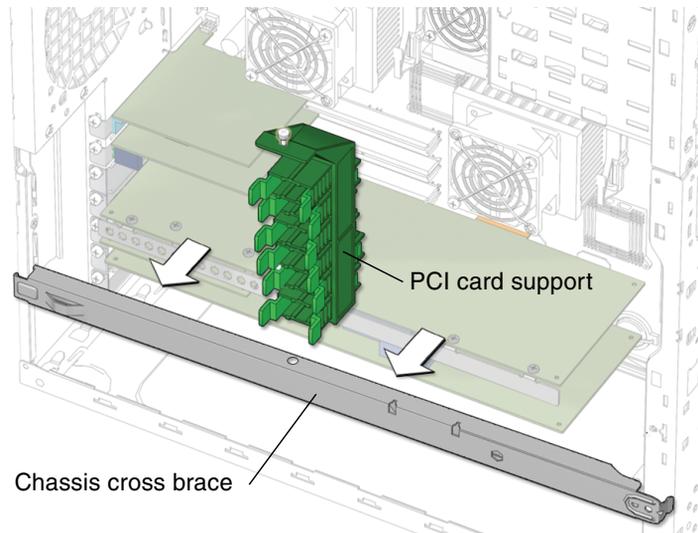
Removing Chassis Cross Brace and PCI Card Support
